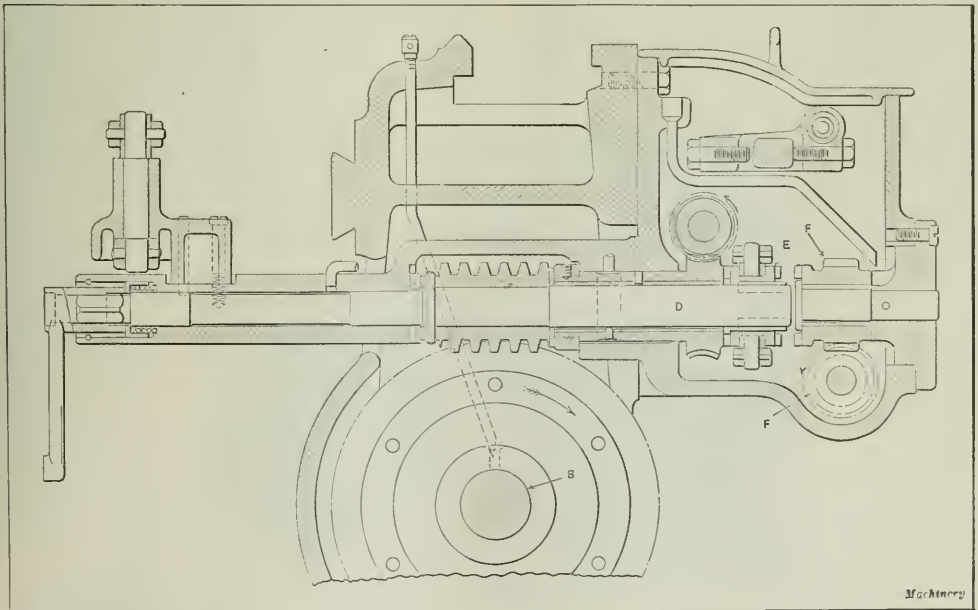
Sectional View of Mechanism by Means of which Fast and Slow Rotation is Imparted to the Camshaft
